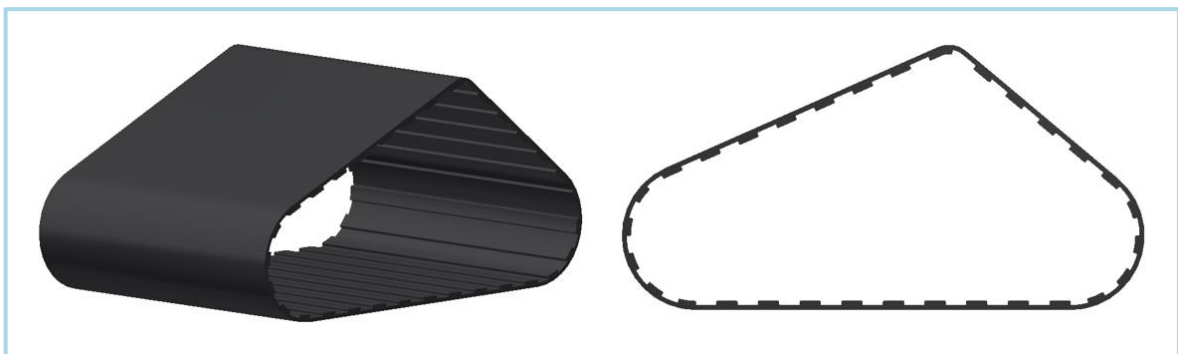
Tread with lugs matching roller design (orthogonal and side view)
